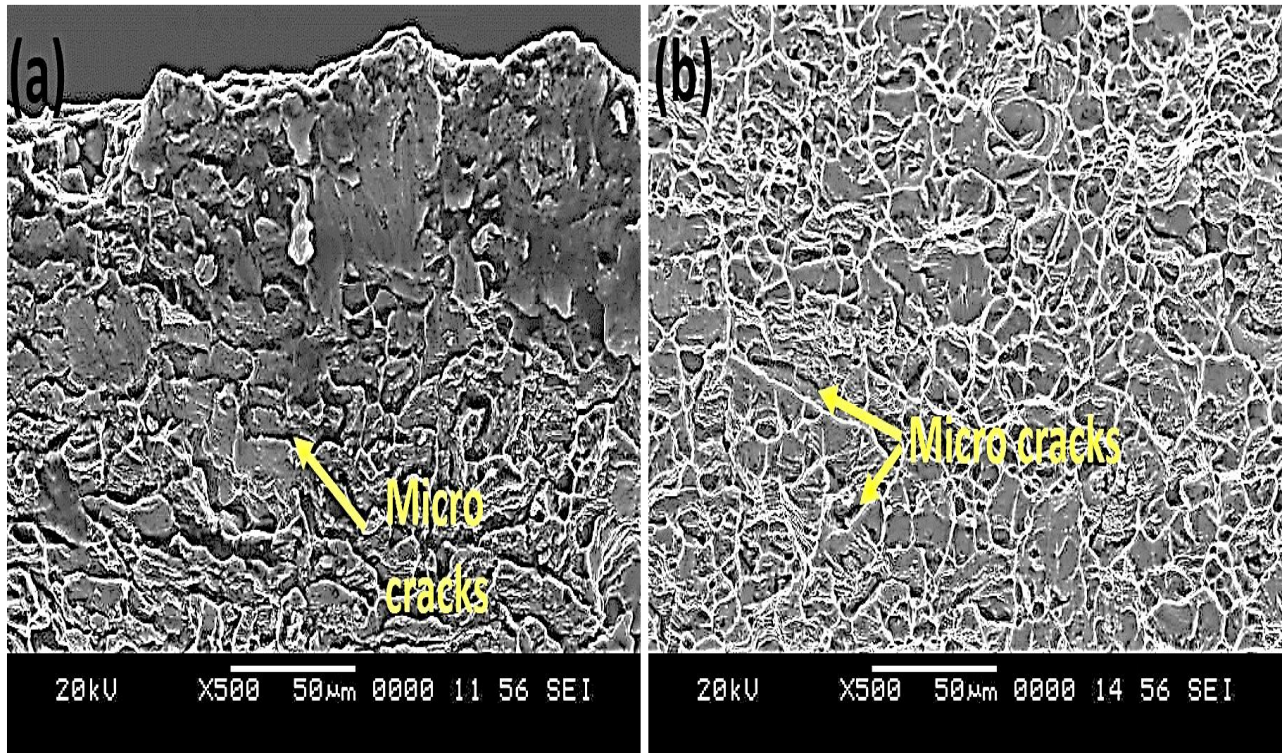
Fractography images of CMT welded A6061-T6 and A6082-T6 joint using ER5356 filler wire: (a) A6061 and (b) A6082
